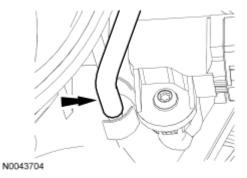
Locating AIR Valve Vacuum Supply Tube Courtesy of FORD MOTOR CO.
